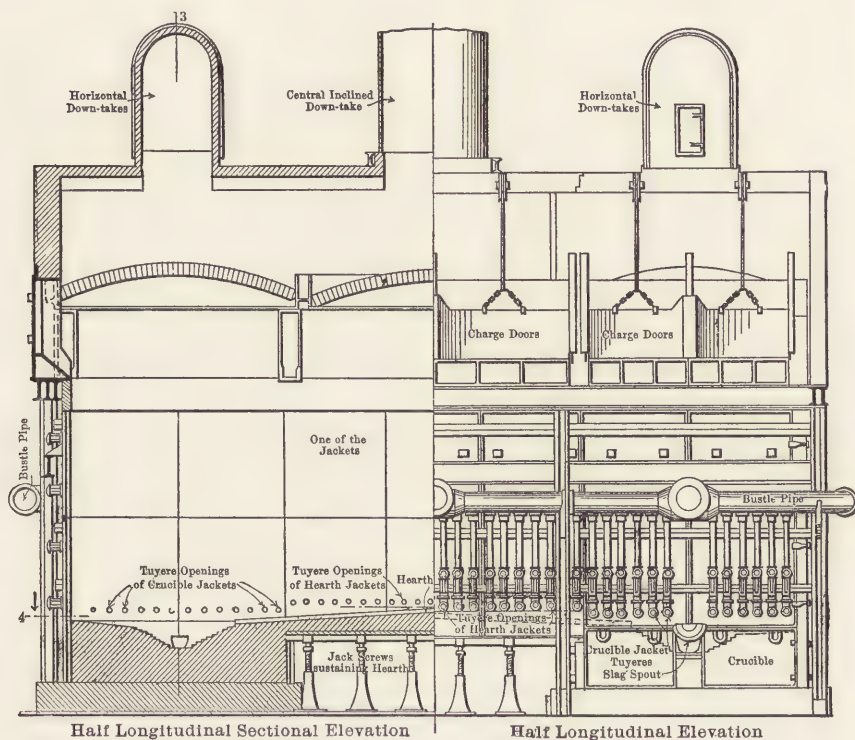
SECTION AND ELEVATION OF 56x612-IN. BLAST FURNACE.
